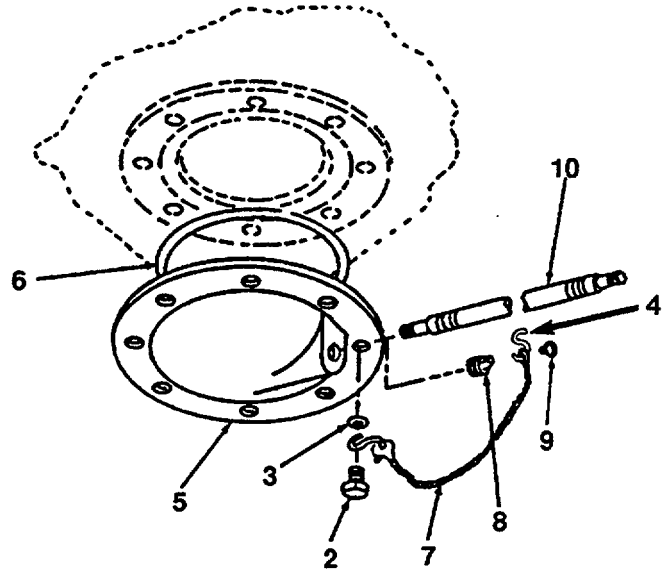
Drain Assembly and Ball Valve (Sheet 1 of 2)
